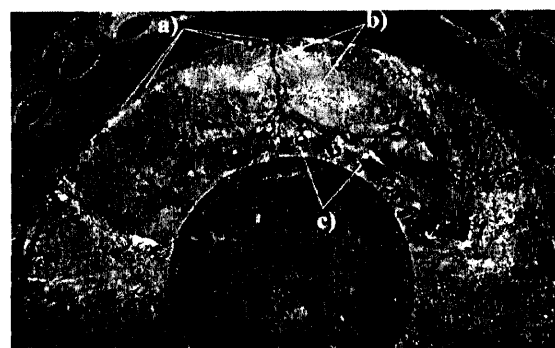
General appearance of fractured surface: (a) multiple fatigue cracks initiations sites, (b) stable fatigue crack propagation front, and (c) drilled holes.
